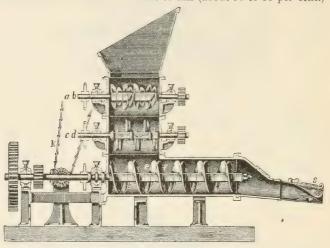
Preliminary tearing and mixing contrivance of A. Heinen's double-shaft peat machine.
